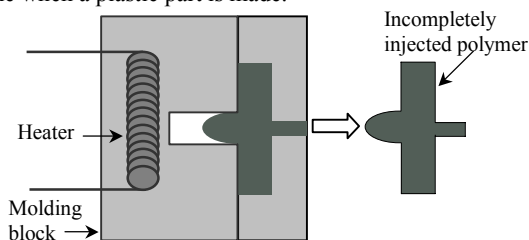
Illustration of an incompletely injected polymer part due to premature cooling inside the mold cavity.
